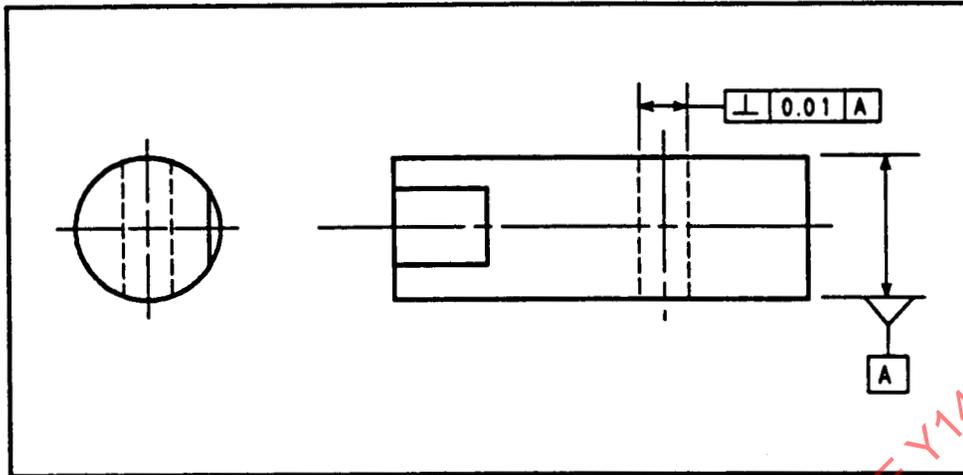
PLANAR PERPENDICULARITY OF AN AXIS; PRIMARY DATUM AXIS; NO SECONDARY DATUM SPECIFIED. A SECONDARY DATUM WOULD PROVIDE NO ADDITIONAL CONTROL
